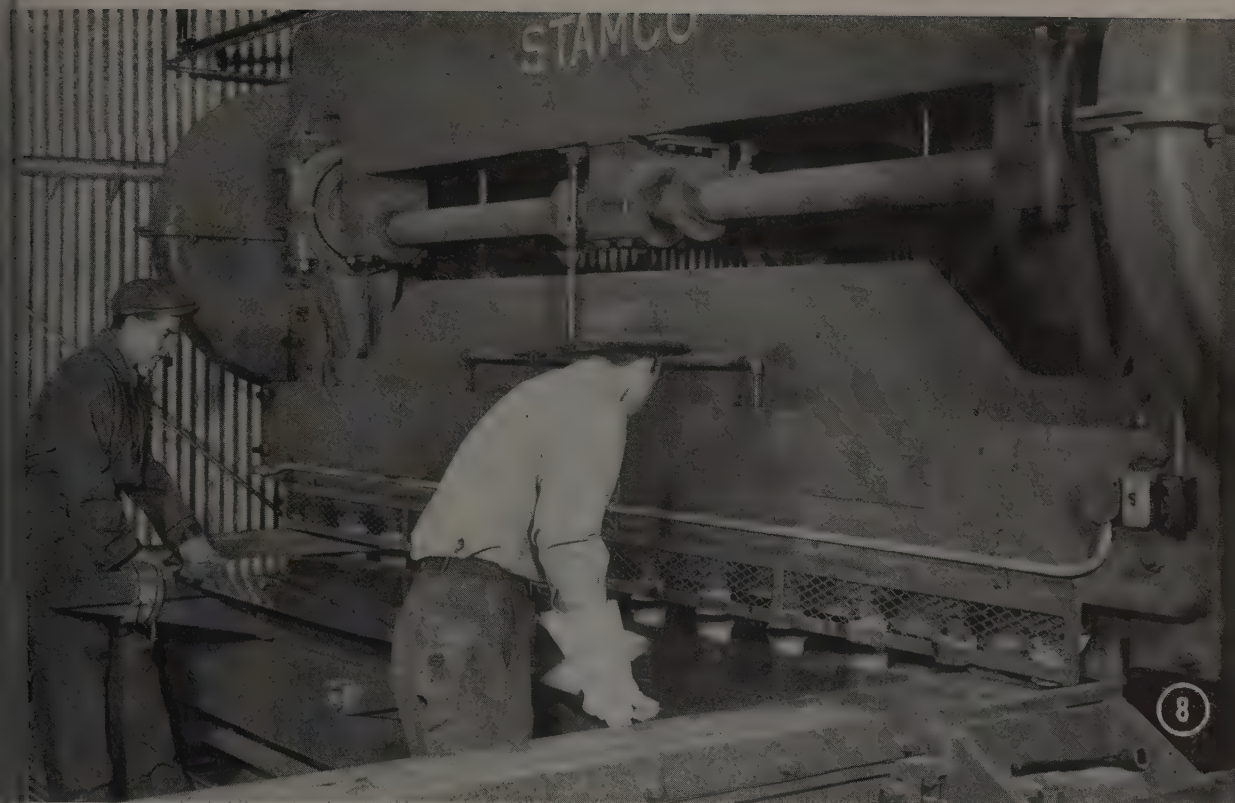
Shearing continuous rolled and polished stainless steel sheet on large squaring shear
